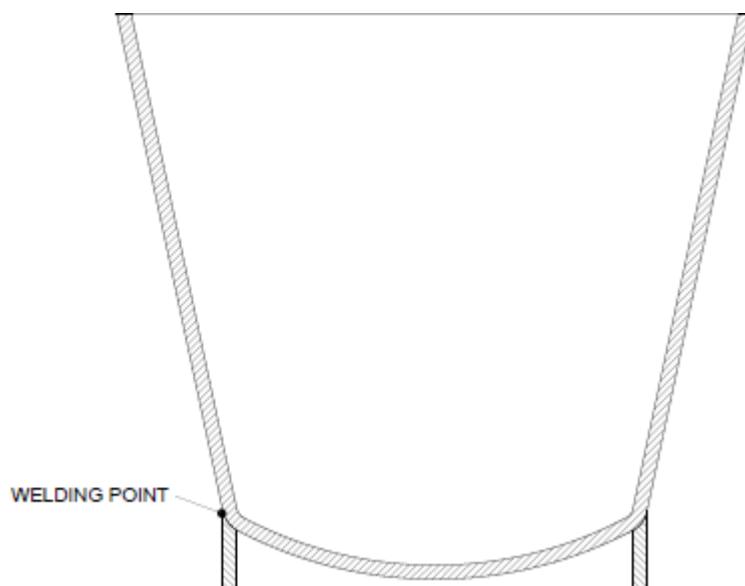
WELDING OF BOTTOM TO THE BUCKET BOTTOM
